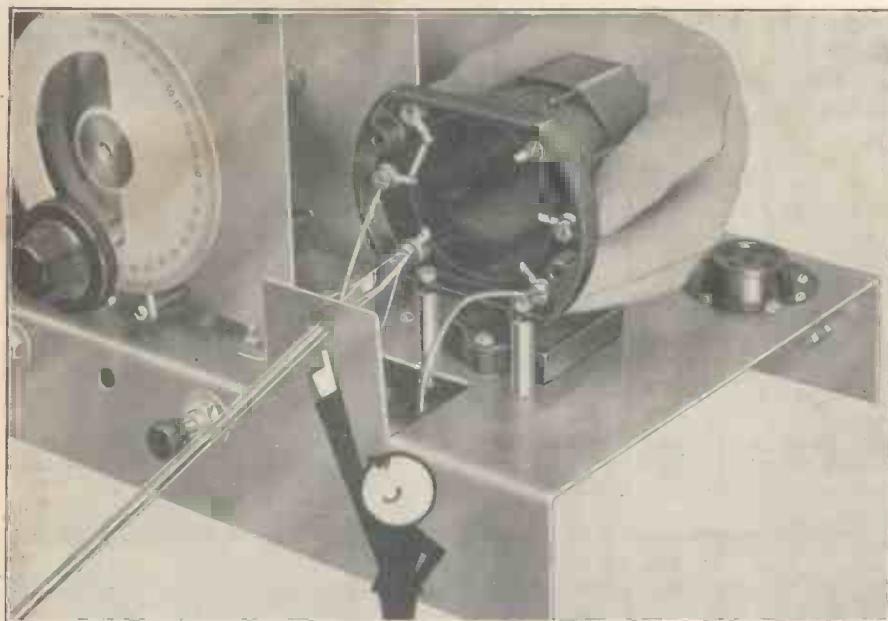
Wiring to coil H.2 will be simplified if the reaction condenser is left until wire No. 23 is in position. Note the suggested position of the screwdriver during this operation.
